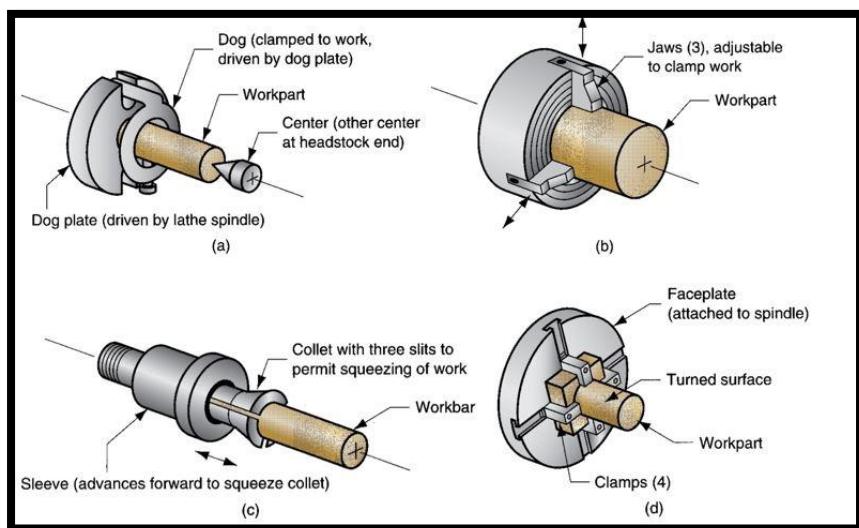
Four work-holding methods used in lathes: (a) mounting the work between centers using a dog, (b) three-jaw chuck, (c) collet, and (d) faceplate for non-cylindrical work-parts [10].
